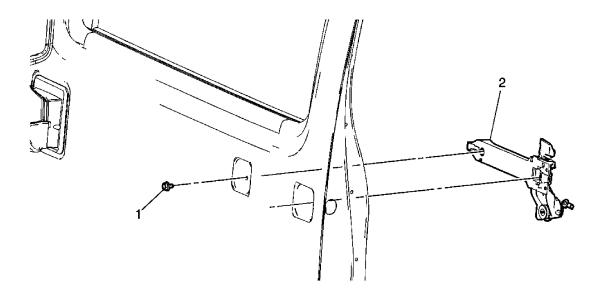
Front Side Door Outside Handle Housing Replacement Courtesy of GENERAL MOTORS CORP.
